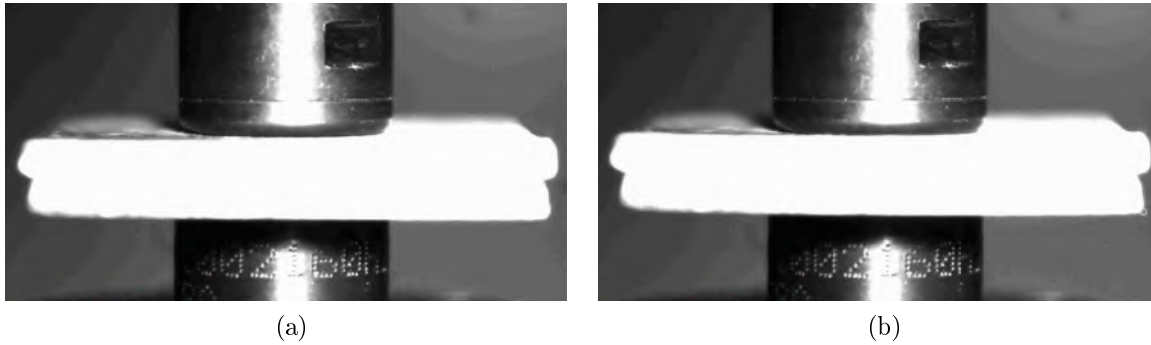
Comparison of images from a riveting cycle for joint B. (a) Start of rivet insertion. (b) During rivet insertion, just before the engagement of the disc springs in the clamping mechanism.
